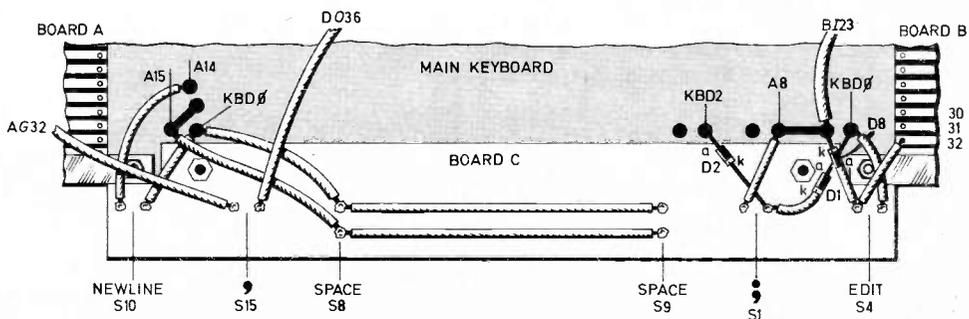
(below). Board C with key-switch positions and interwiring to the main board and boards A, B and D.
